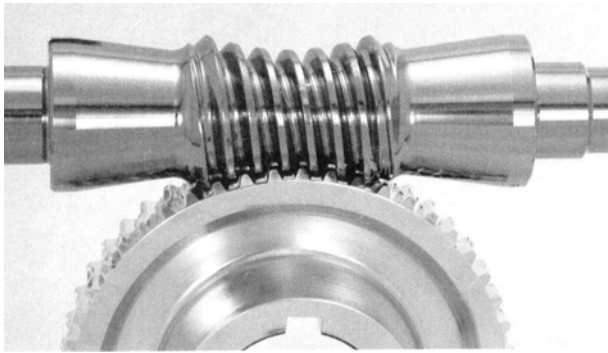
CONE DRIVE worm gear system [2], (top),
